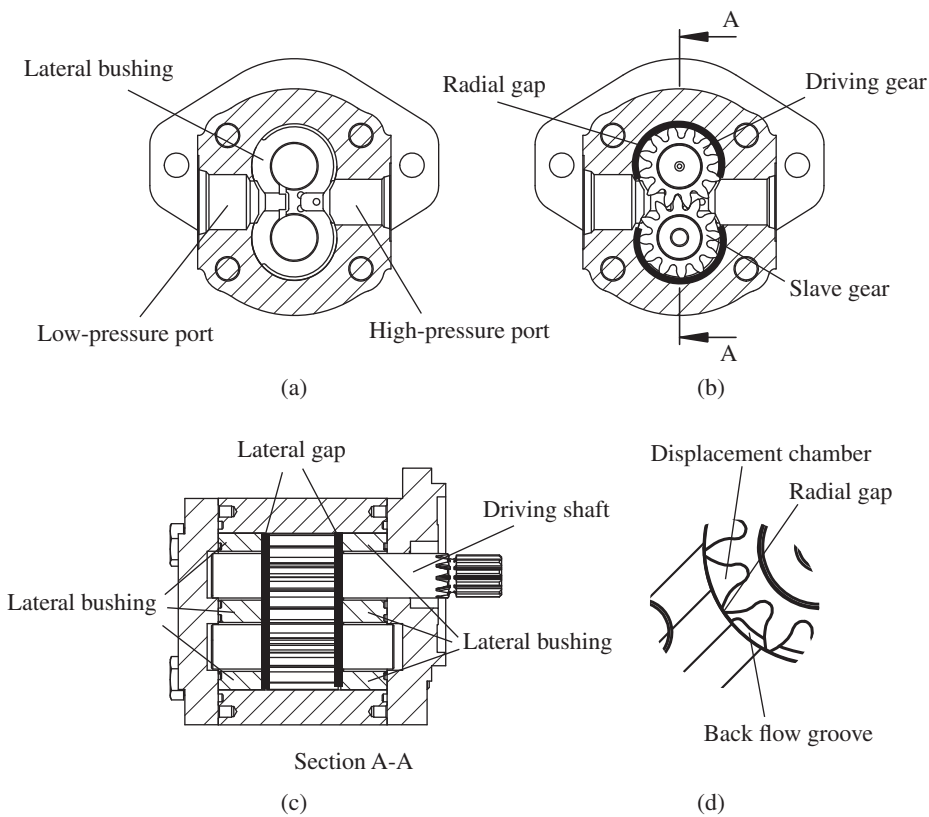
External gear machine: (a) view of the lateral bushing surface facing the gears; (b) gears and tooth tip circumferential gap; (c) section A-A of figure (b) detail on the lateral gap; (d) detail on the backflow groove used to influence the tooth space volume pressure.
